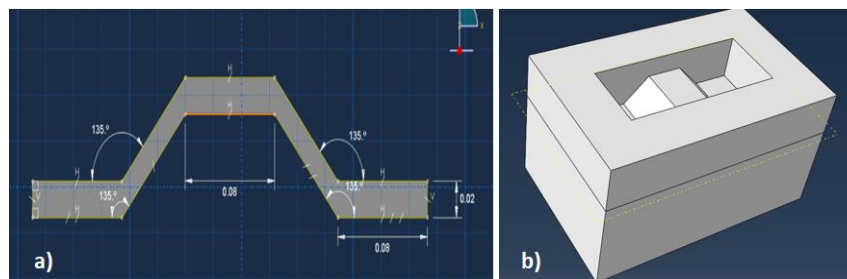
a) Casting Part's Geometry. b) Mold's Geometry.
